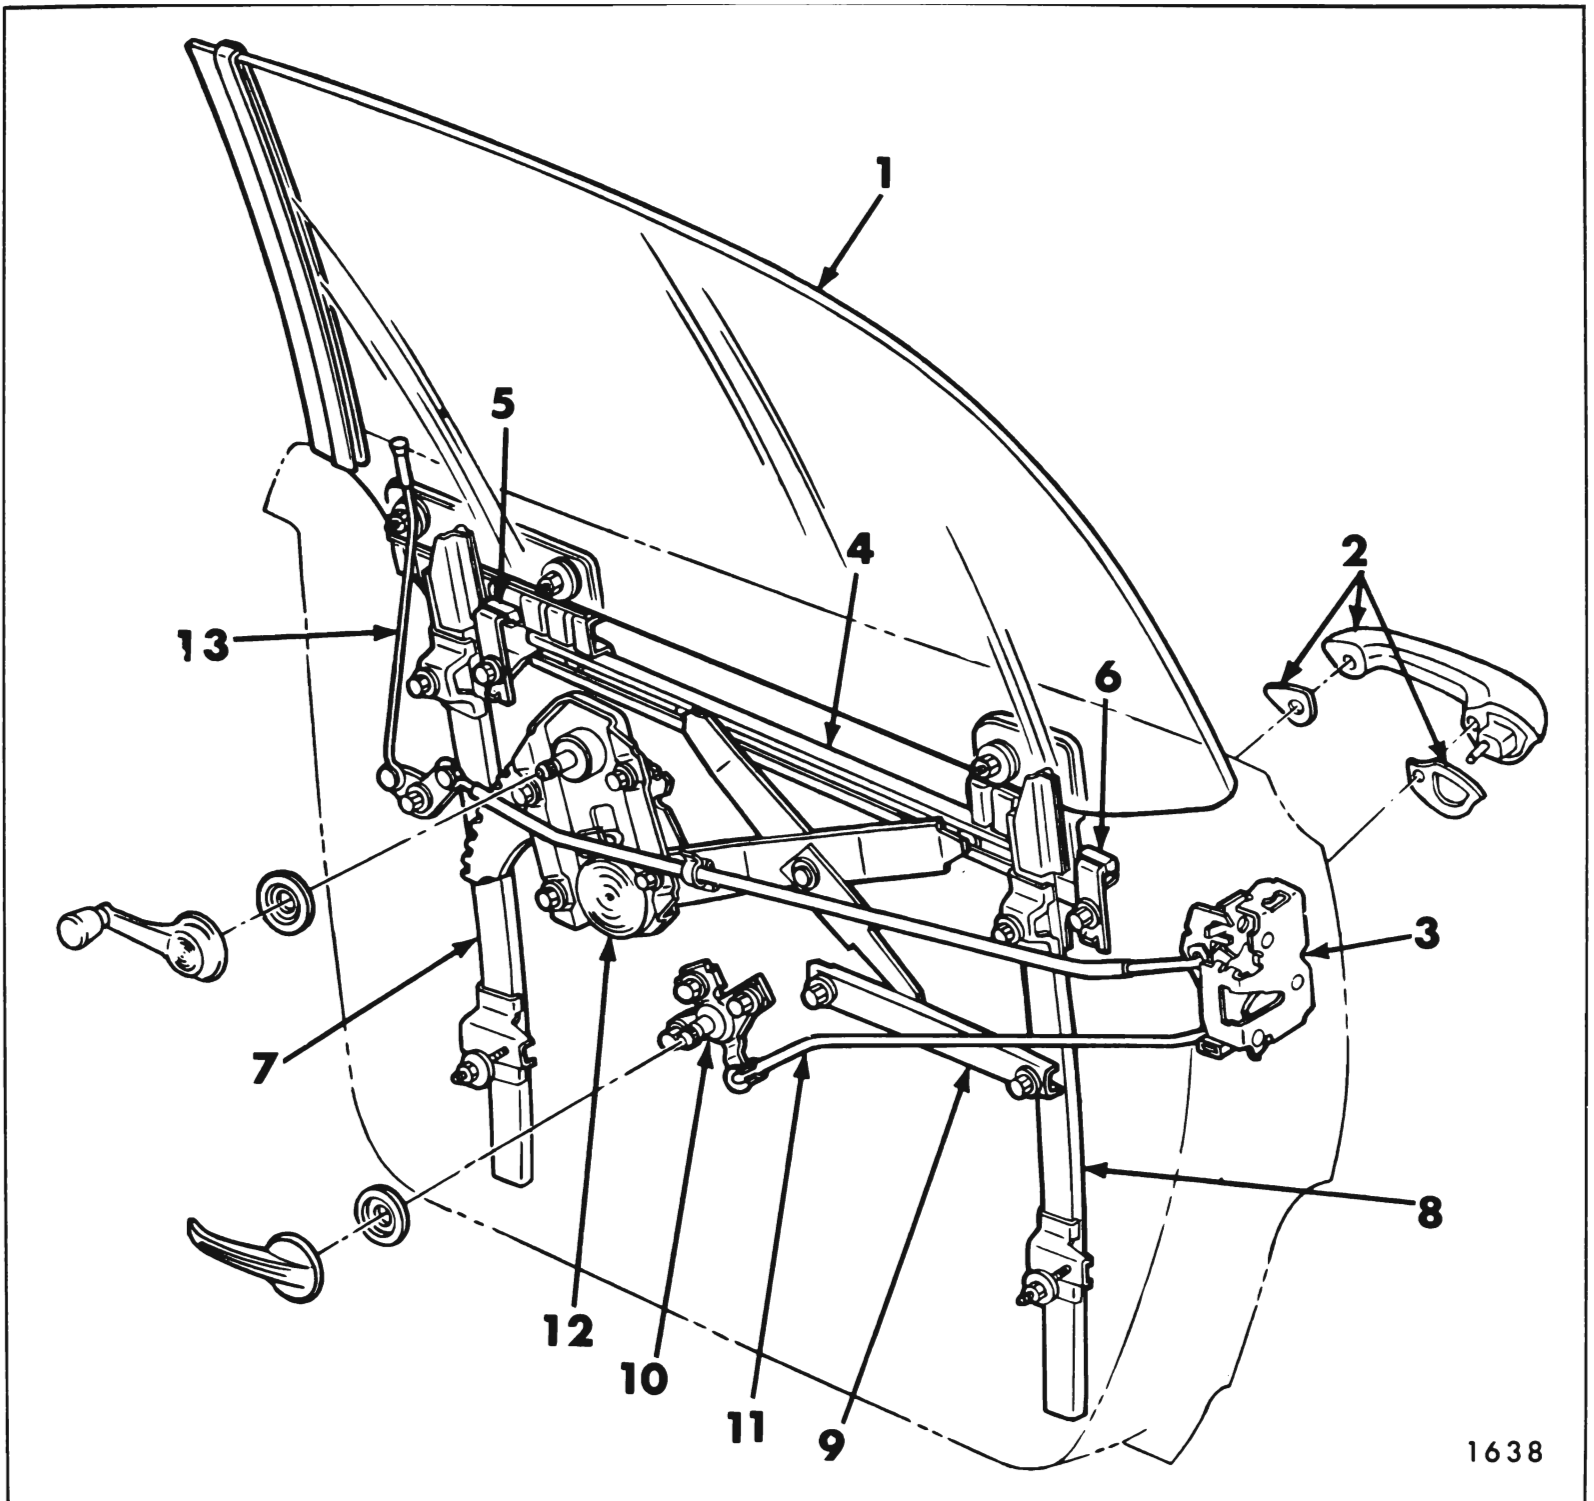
Rear Door Hardware - "Z-39" Styles
